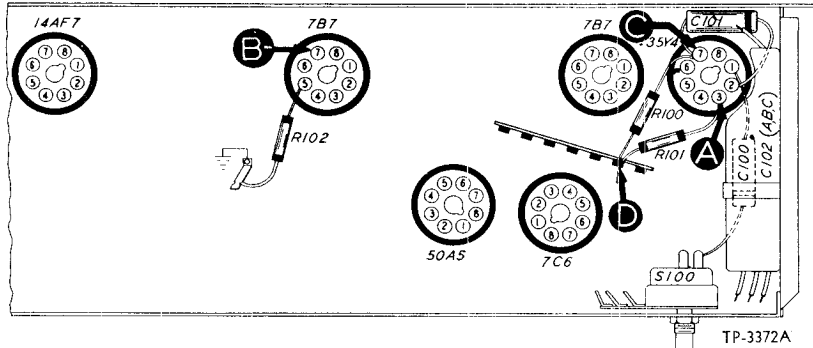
BOTTOM VIEW, SHOWING SECTION 1 TEST POINTS.
